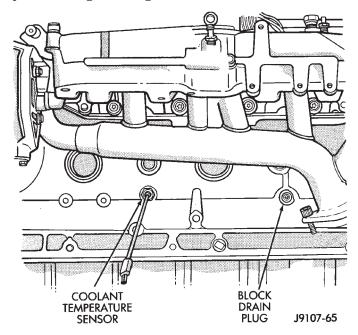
Drain Plug—4.0L 6-Cylinder Engine
